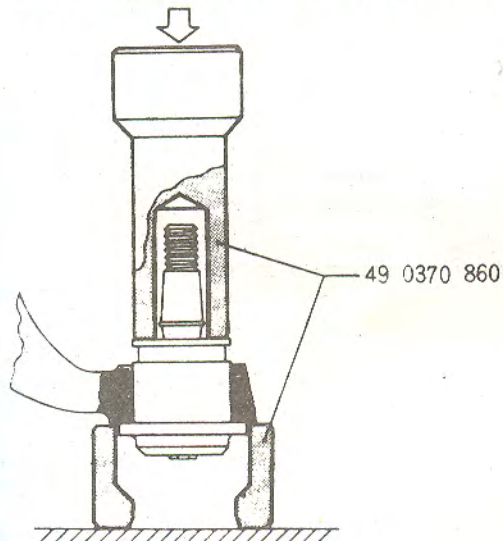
Removal of the ball joint. The installation of the joint is carried out with the same tool, but this must be turned round for this operation.
